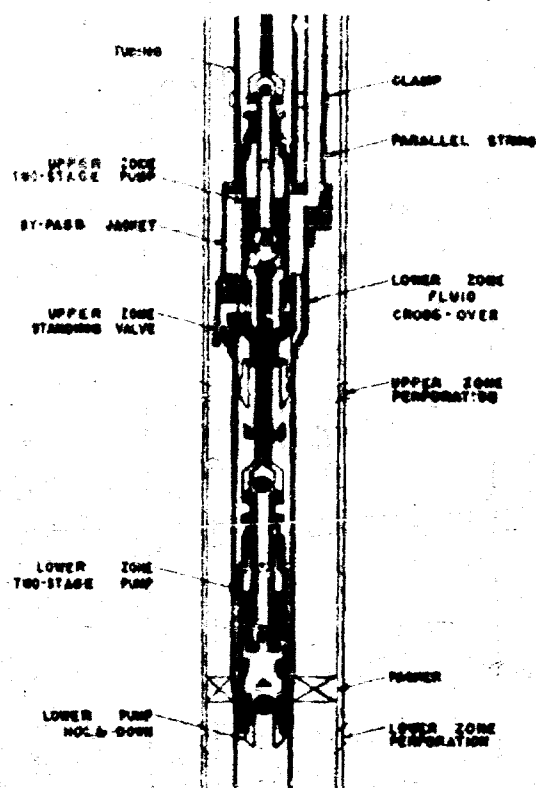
SINGLE-PACKER DUAL-ZONE-PUMP INSTALLATION WITH DOUBLE-CLAMPED-STRINGS
